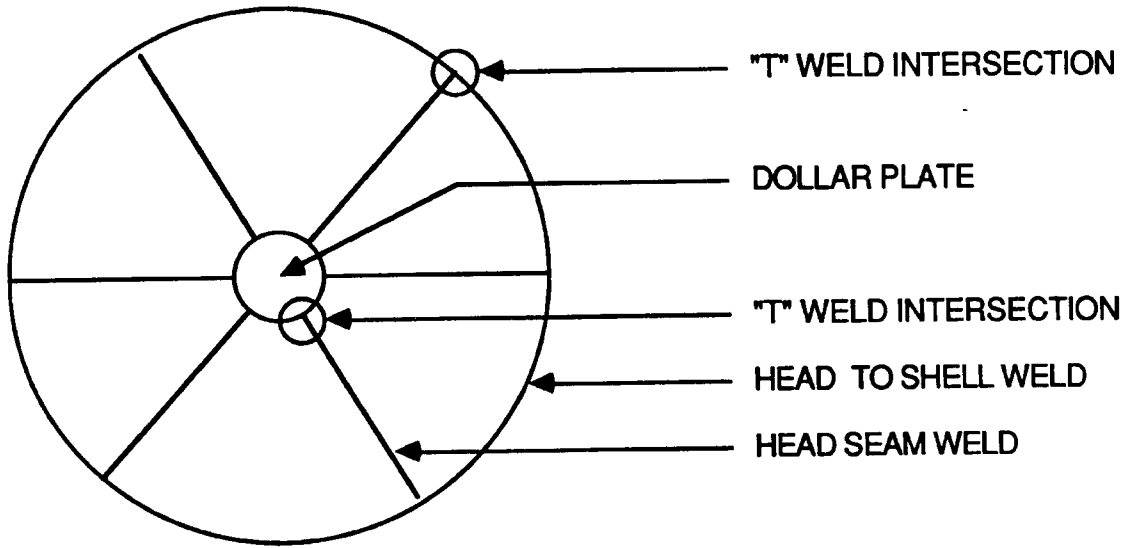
END VIEW OF PVCT SHOWING HEAD SECTIONS
